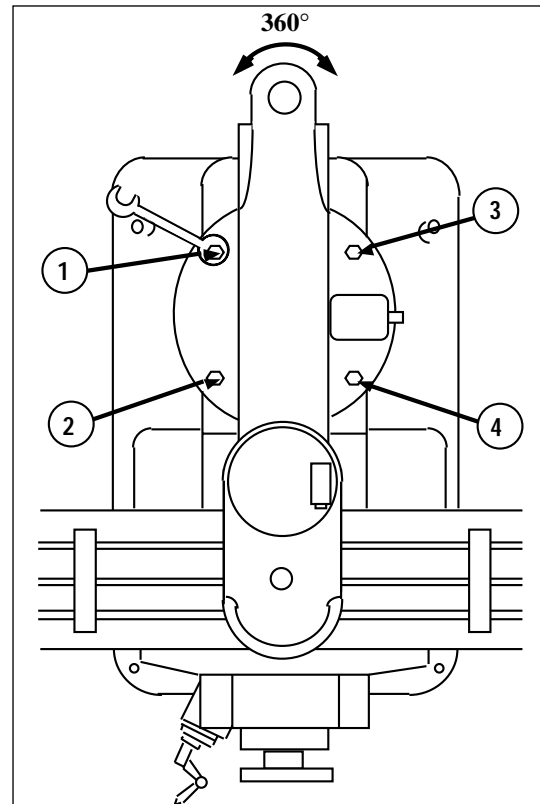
Top View of EZTRAK, showing the 4 bolts to be loosened to swivel the turret.
